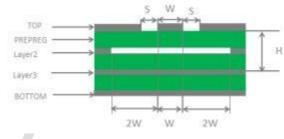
Coplanar waveguide structure of four-layer PCB board (reference is the third layer)
